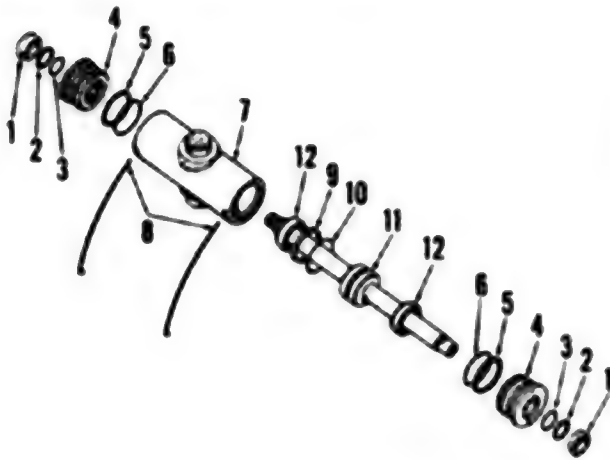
Exploded view of steering cylinder assembly. Spacers (12) are used only on All Wheel Drive models.
